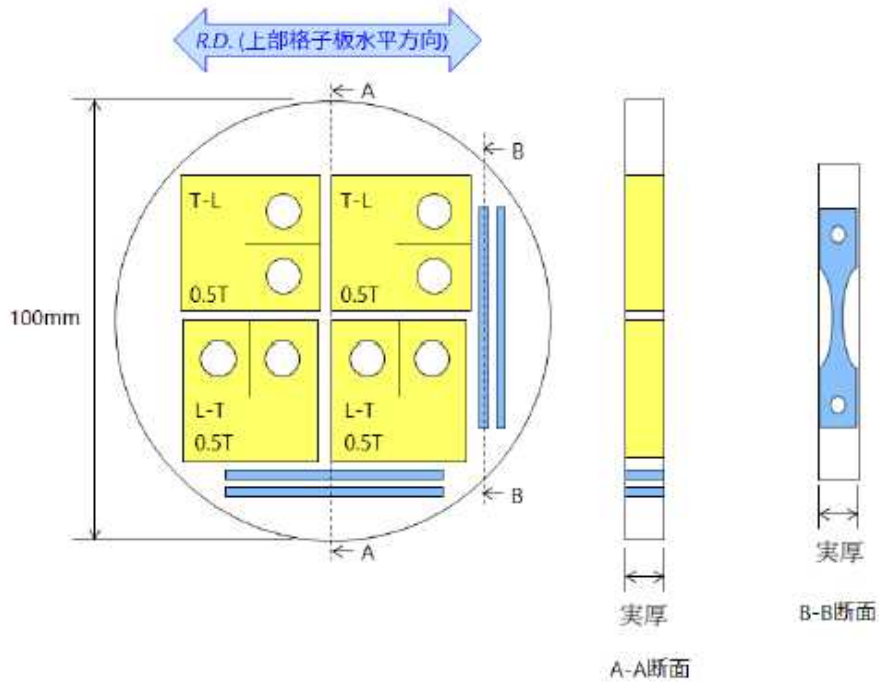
Plans for machining-out test specimens (core shroud φ100 mm specimen, 0.5T-C(T))
